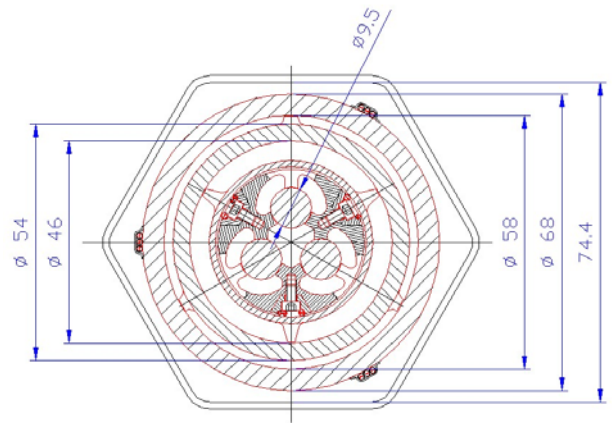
Shape & Dimension of Horizontal Section of IVA
